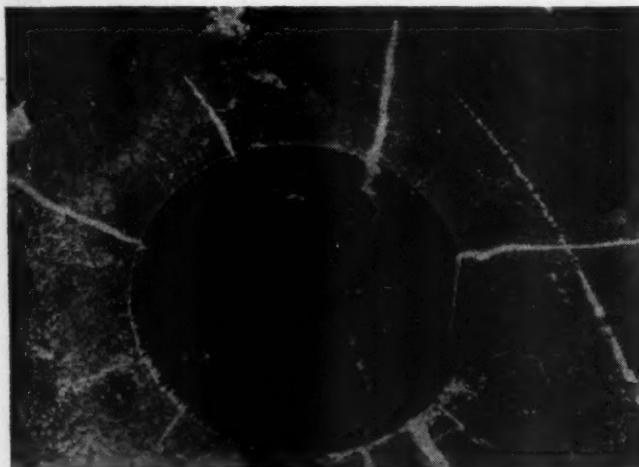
Cracks originating at rim or edge of rivet hole, lap joint of second course—Note extreme sharp edge
